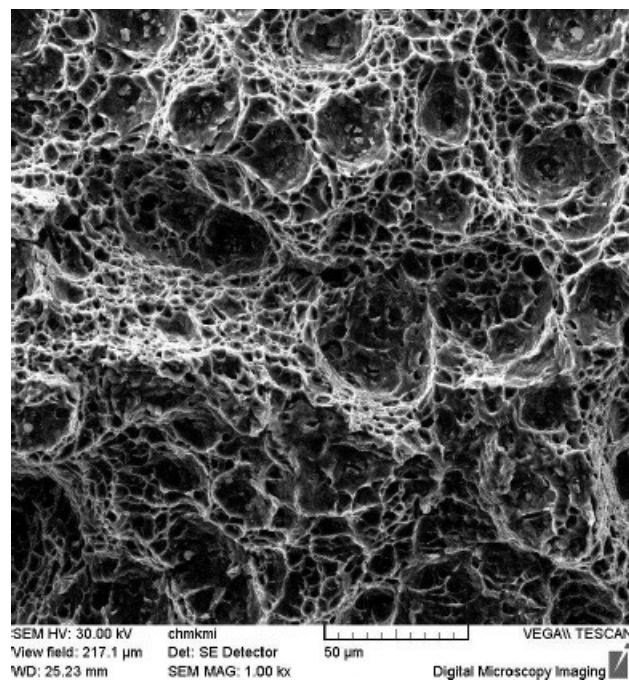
Microvoids and dimples on ductile fracture surface. [30]
